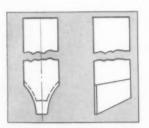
ABOVE. Fly Cutter. FIG. 4. BELOW. Form cutter.
